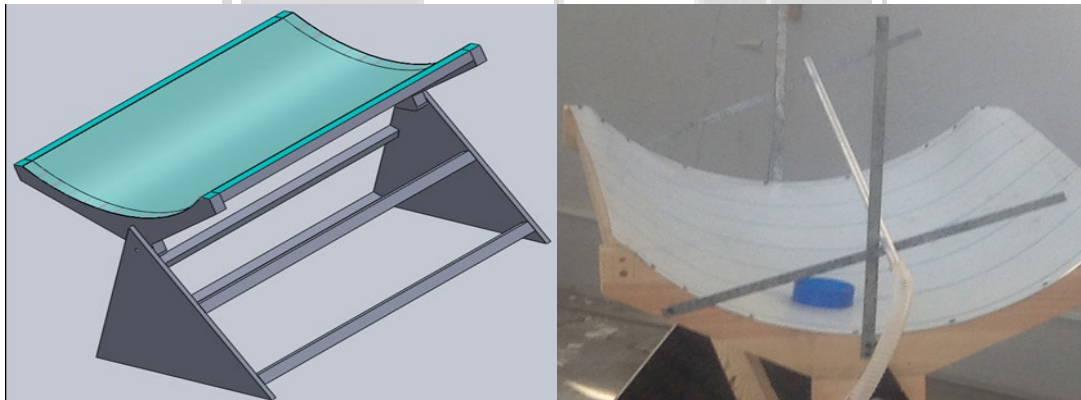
Fixing the sheet of iron sheet to the parabolic frame
